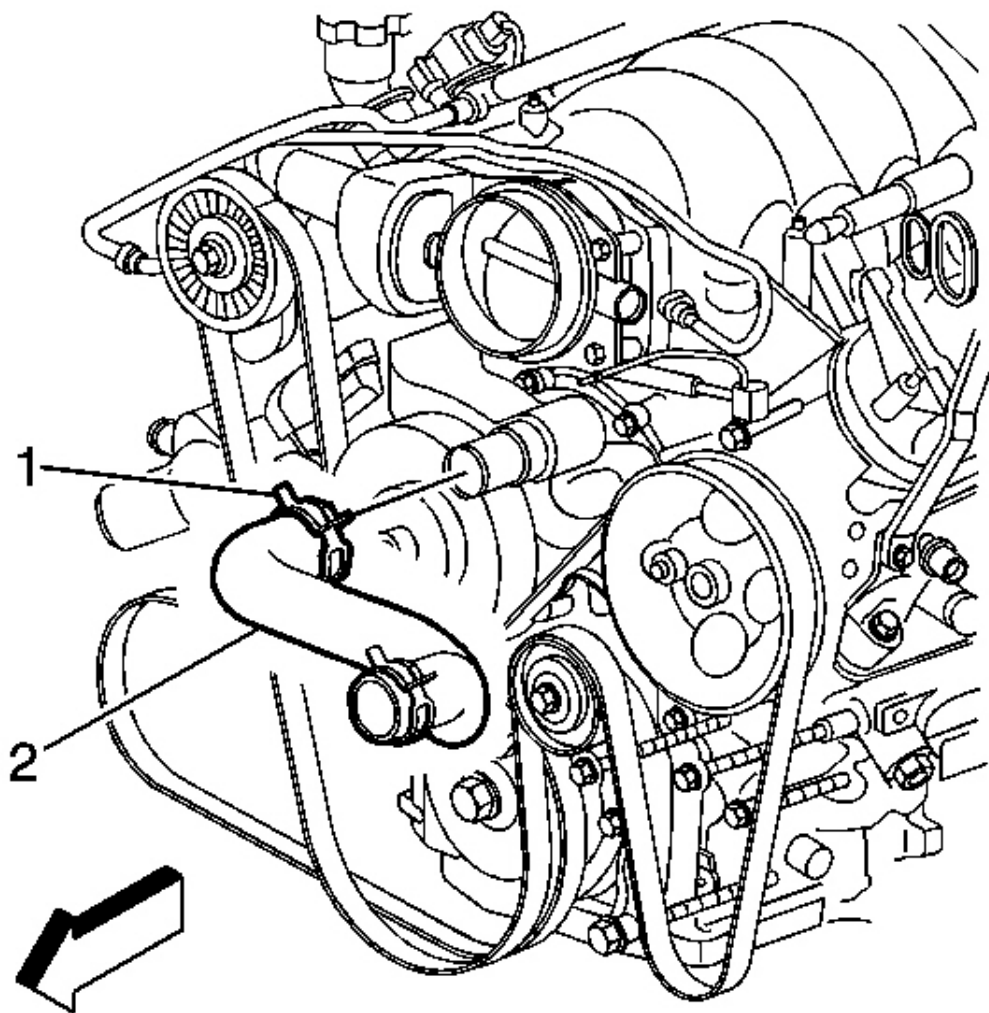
Radiator Inlet Hose & Clamp At Engine
